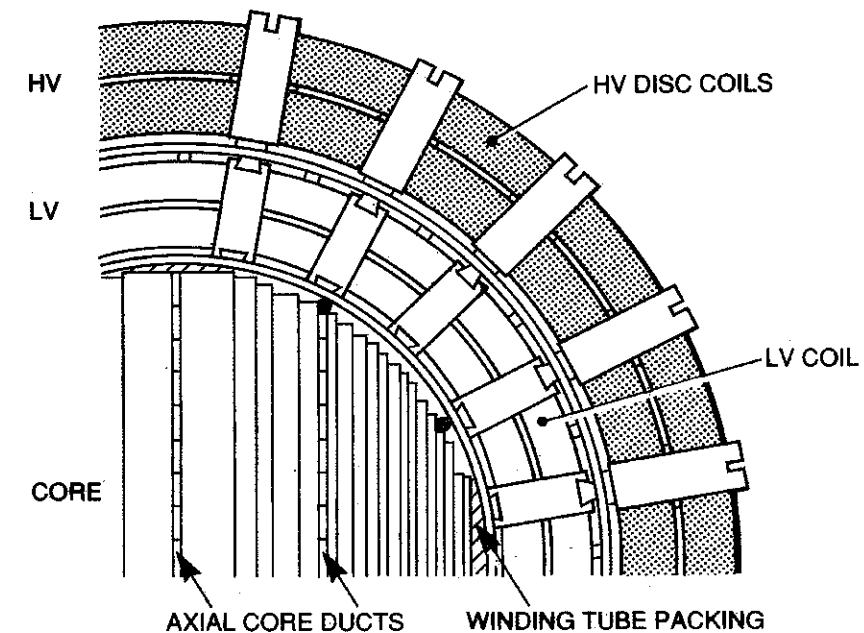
Transverse section of core and windings, showing axial cooling ducts above and below windings and dovetailed spacers which form radial ducts
